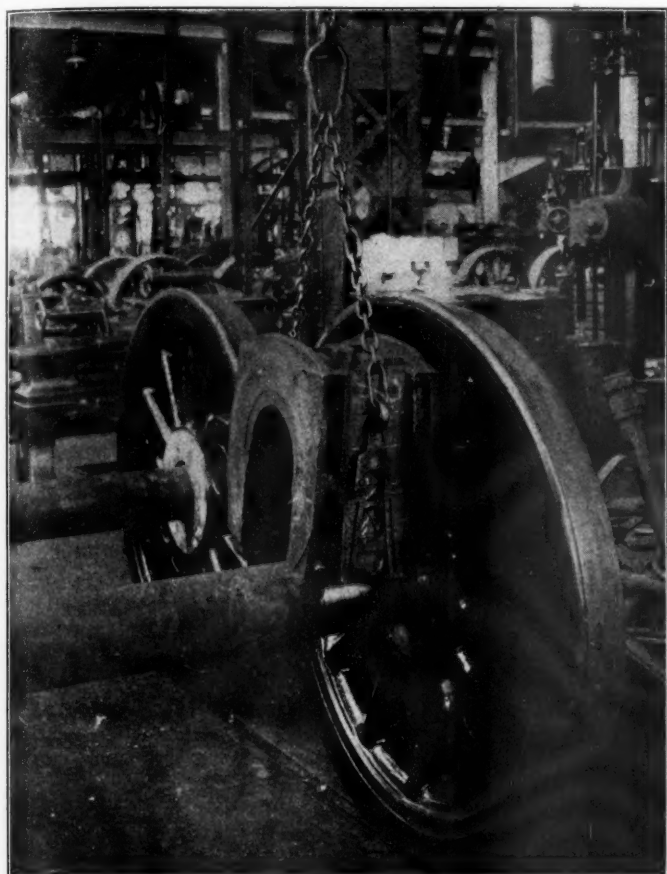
Expanding Wedge Device Used in Handling Driving Boxes.
